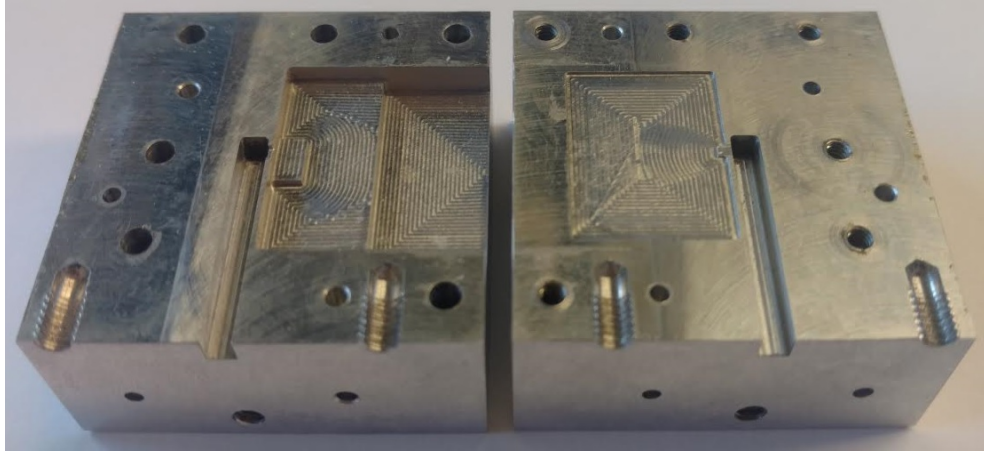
Photograph of machined V-band waveguide housing. The waveguide is WR-15 and made of Al. Each split block is approximately 3.5 cm per side. WR-19 waveguide housings were also fabricated.
